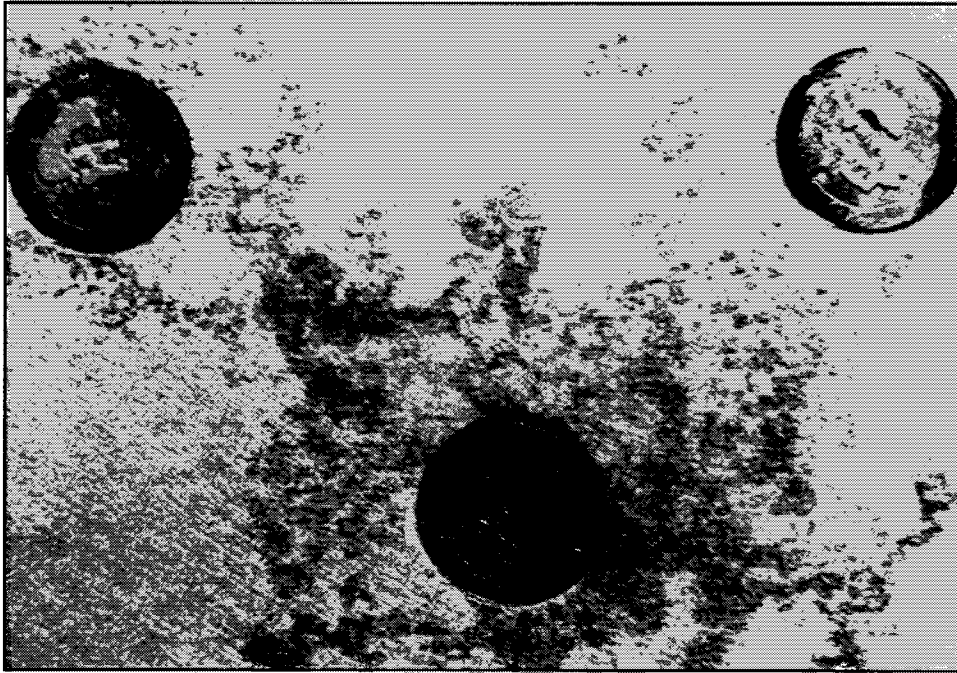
CORRODED AREA AFTER PAINT REMOVAL FROM WING SKIN
